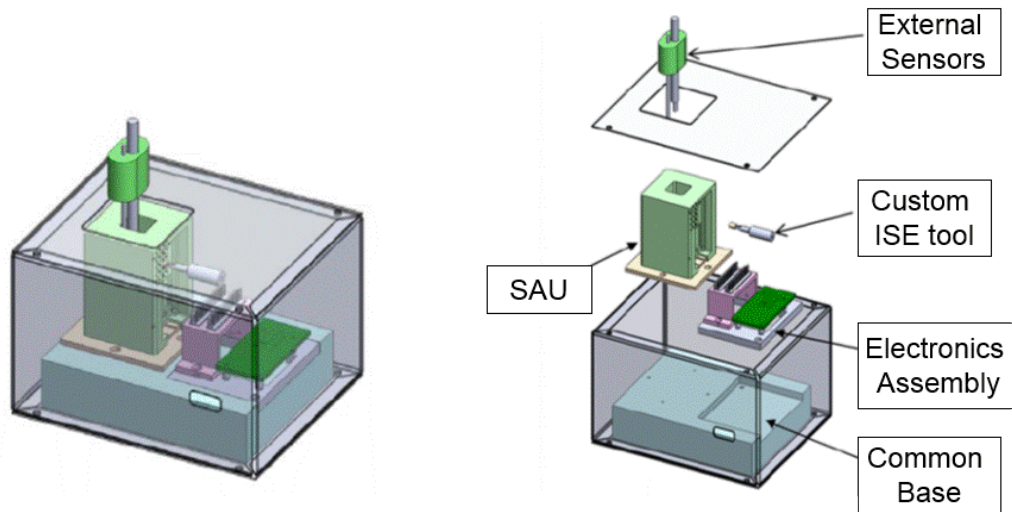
Design of the CHEMSENS test platform assembled (left) with parts (right).
